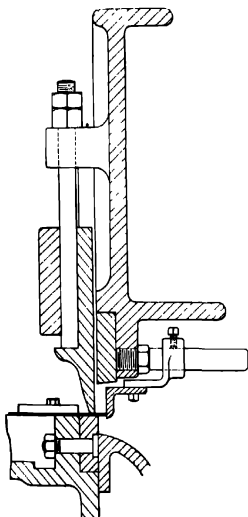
Arrangement of cramp and back gauge on Taylor & Challen guillotine shears.
